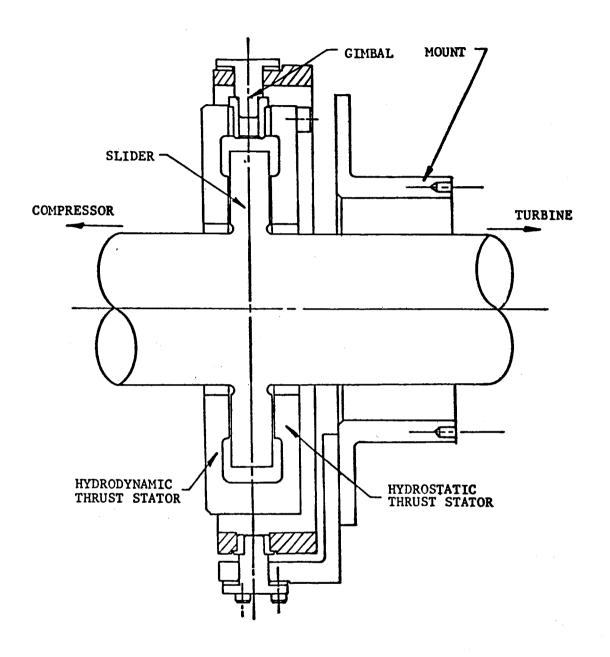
THRUST BEARING AND GIMBAL ASSEMBLY. RADIAL FLOW TURBOCOMPRESSOR.
